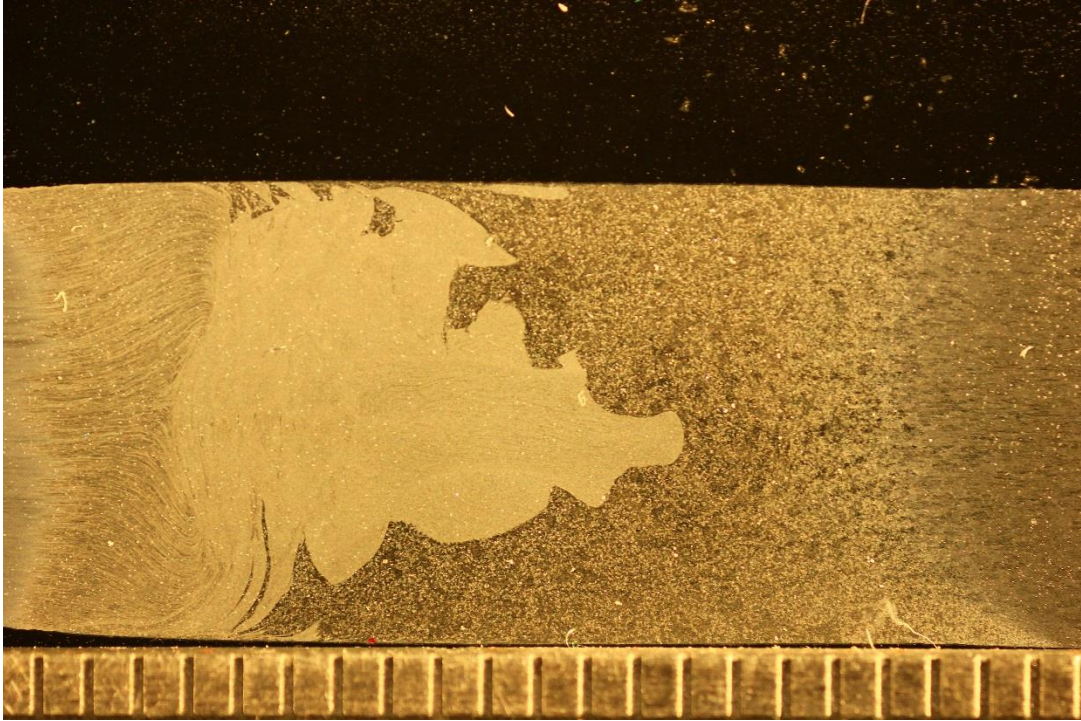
Macrograph of Weld 5 Sample 5
